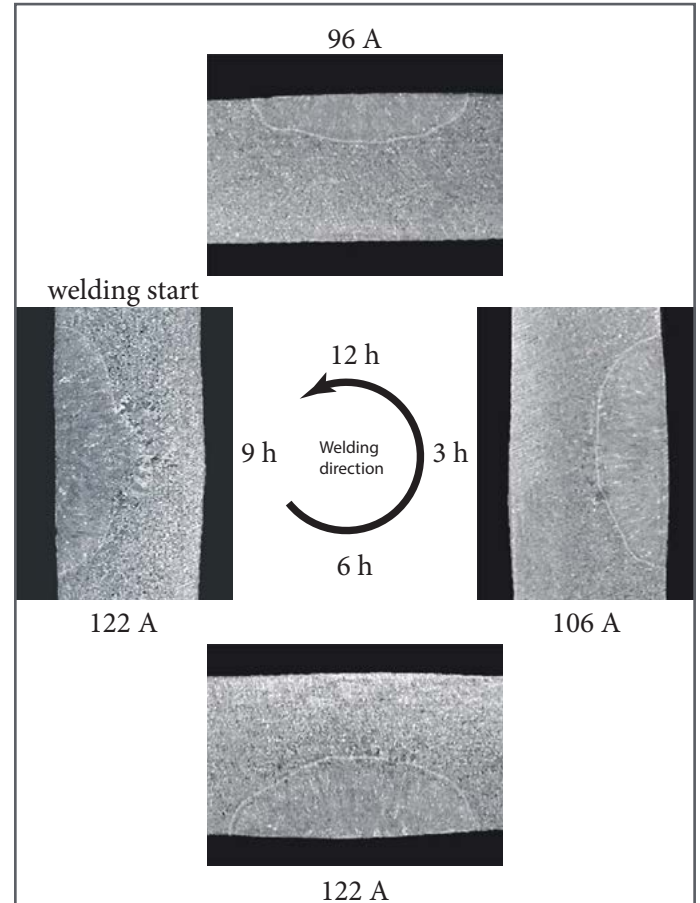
Macrostructure of orbital Ar-shielded TIG welded joint
